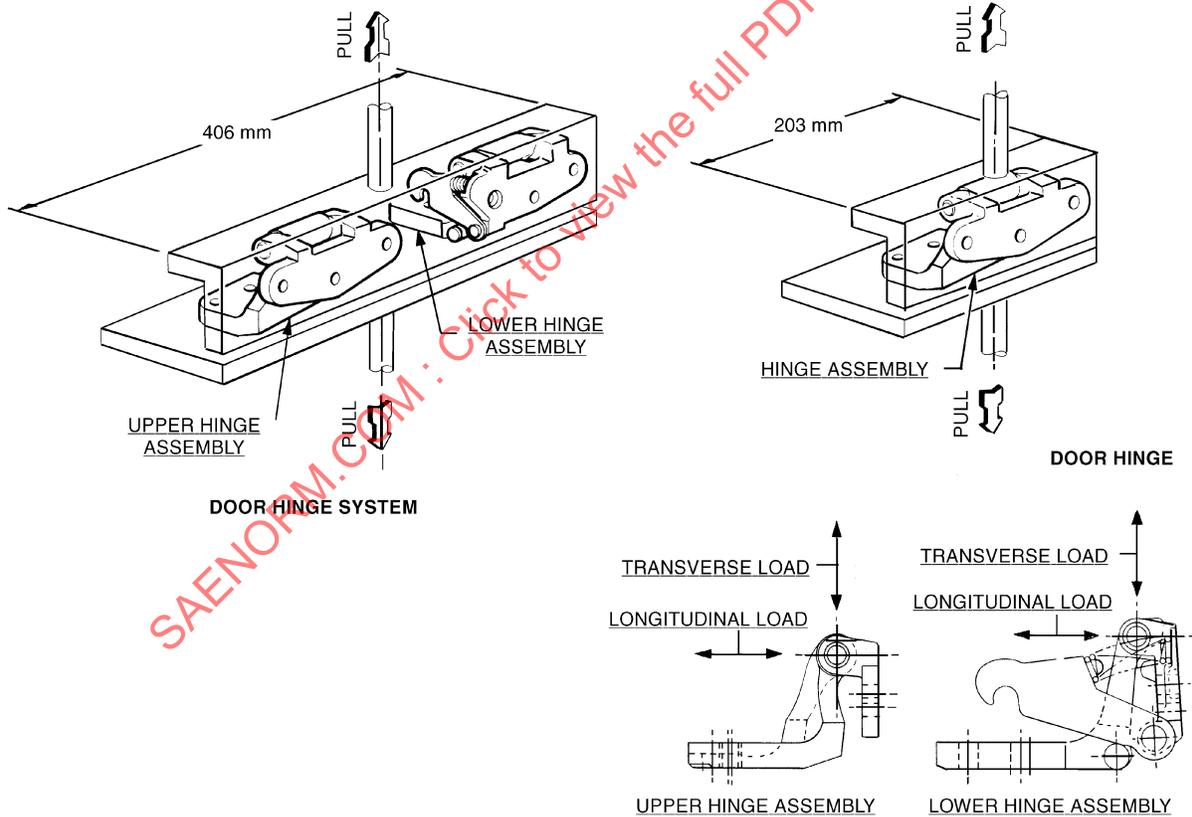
STATIC LOAD FIXTURES (TRANSVERSE LOAD)
